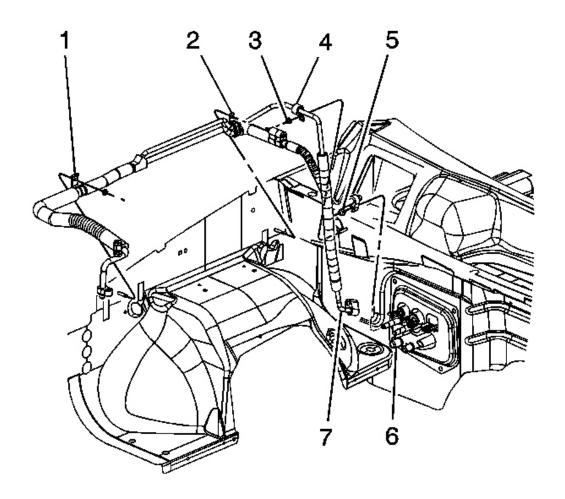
Removing/Installing Evaporator Tube (Long Wheel Base) Courtesy of GENERAL MOTORS CORP.
